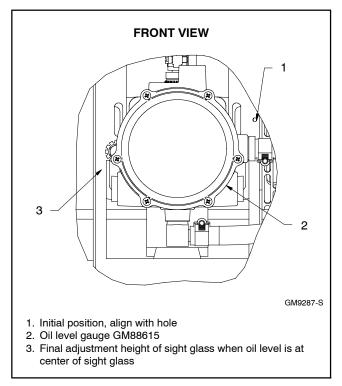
Oil Level Gauge GM88615 Mounting, Front View
